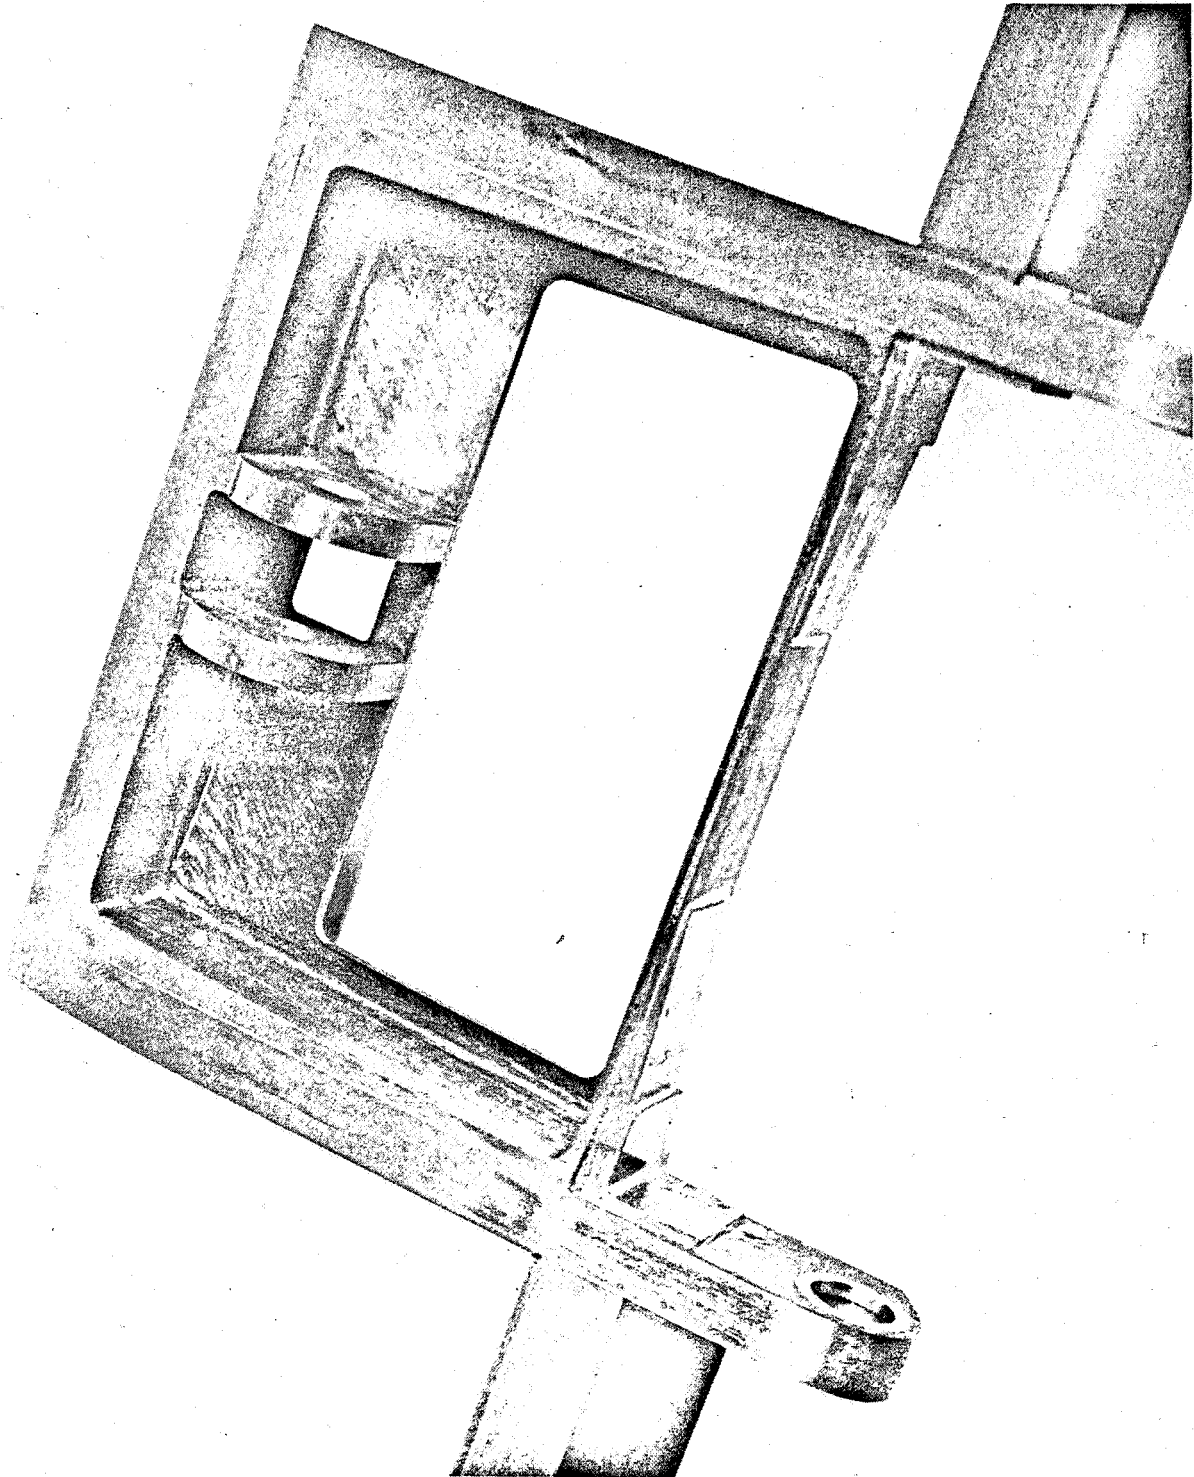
CENTER HINGE FITTING OF INTEGRAL HINGE/SPAR ASSEMBLY
